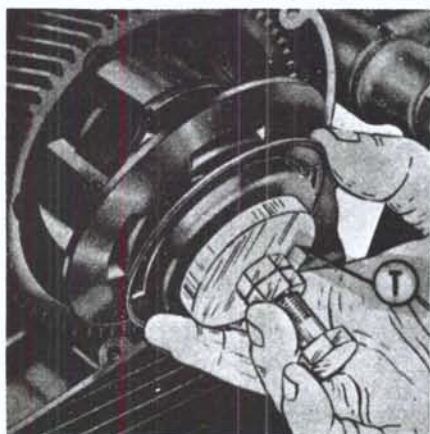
Special tool (part number 55906500) or equivalent must be used to compress springs for removing and installing pressure plate, springs and spring plate.
